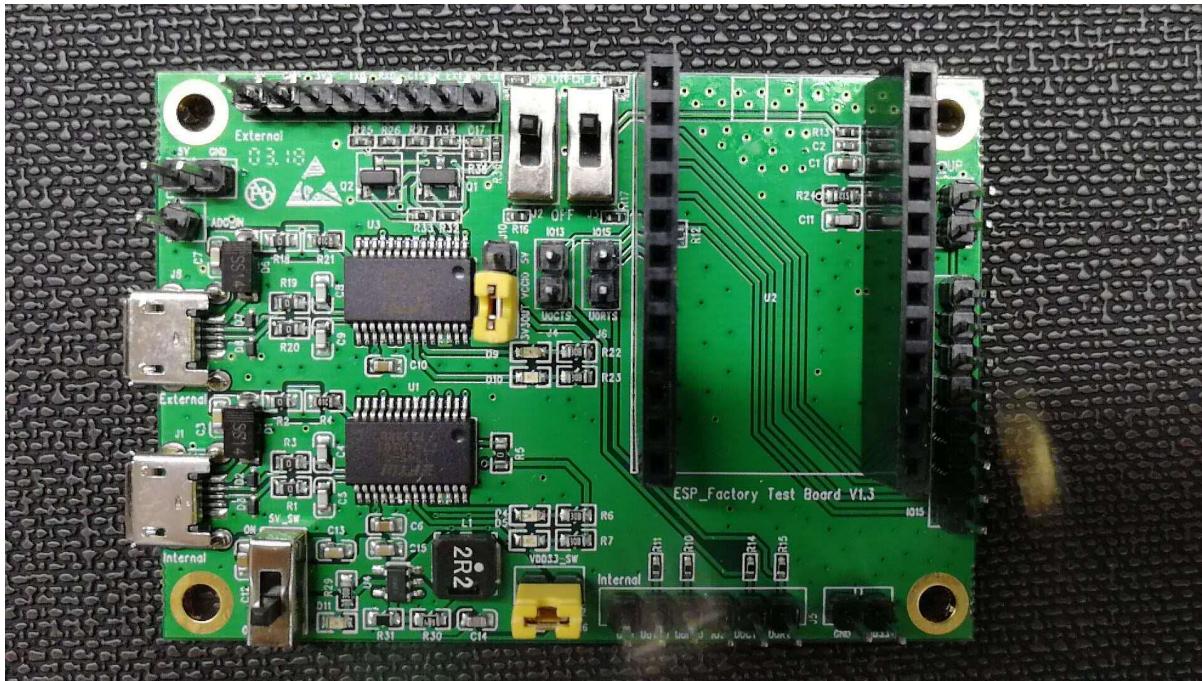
A Typical Serial Port Board (ESP\_Factory Test Board V1.3)
